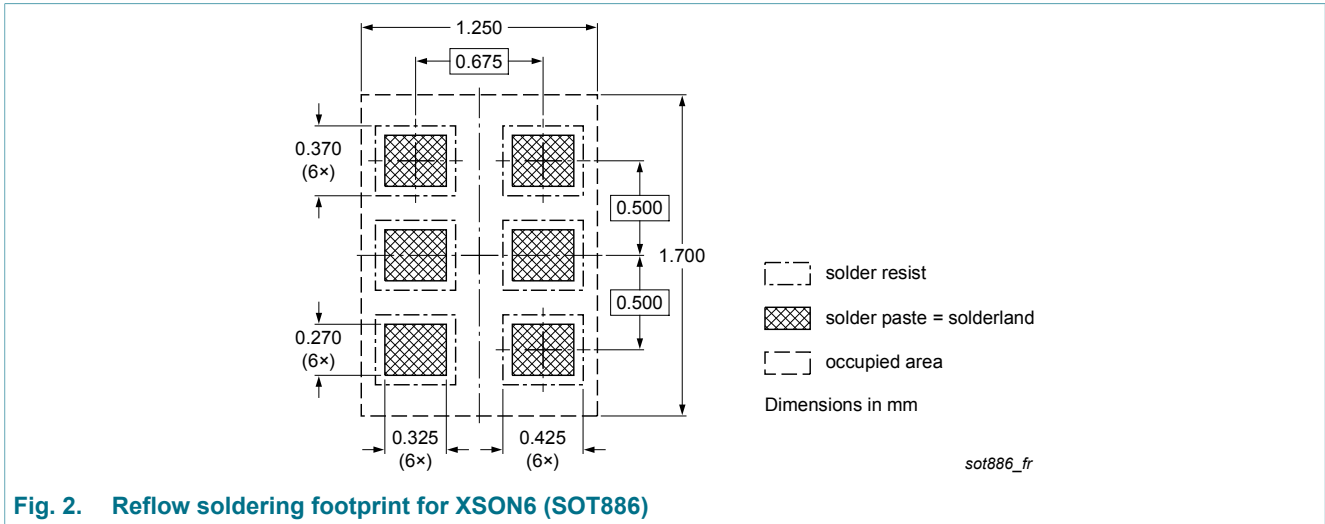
Reflow soldering footprint for XSON6 (SOT886)
